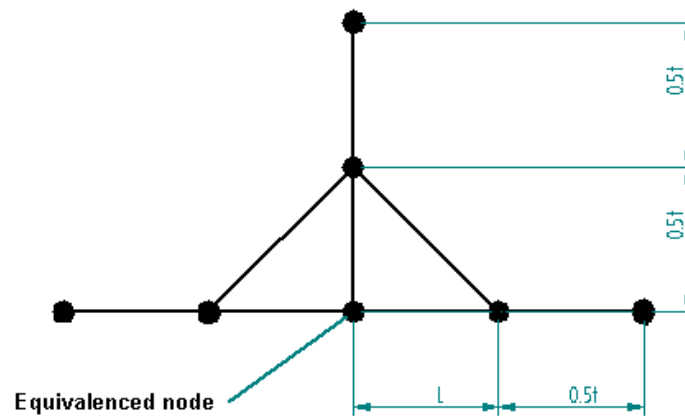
Full penetration weld modeling by means of shell elements.
